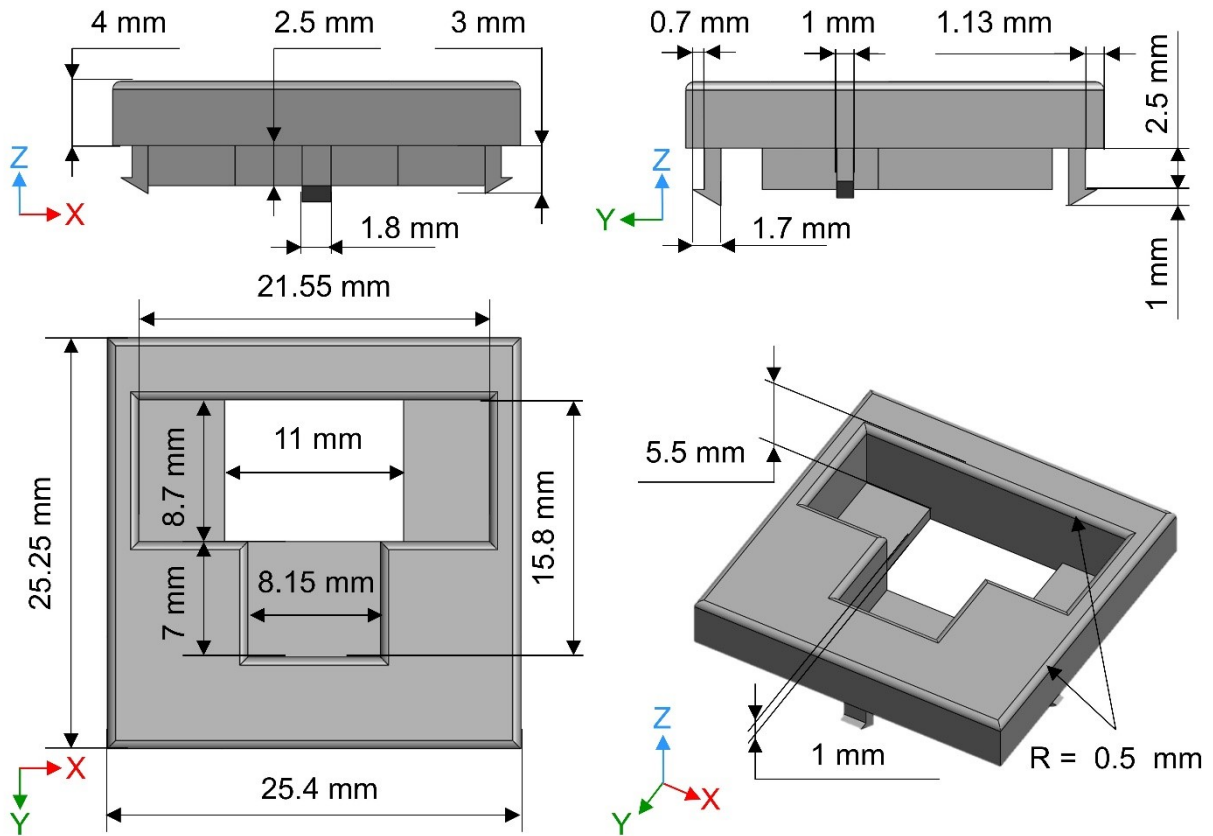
Dimensions of the 1PP adapter. The reusable adapter is secured with a click-fit into the square mounting positions of the 2PP sample holder. Design tolerances were optimized to ensure a snug fit of the 1PP manifold.
